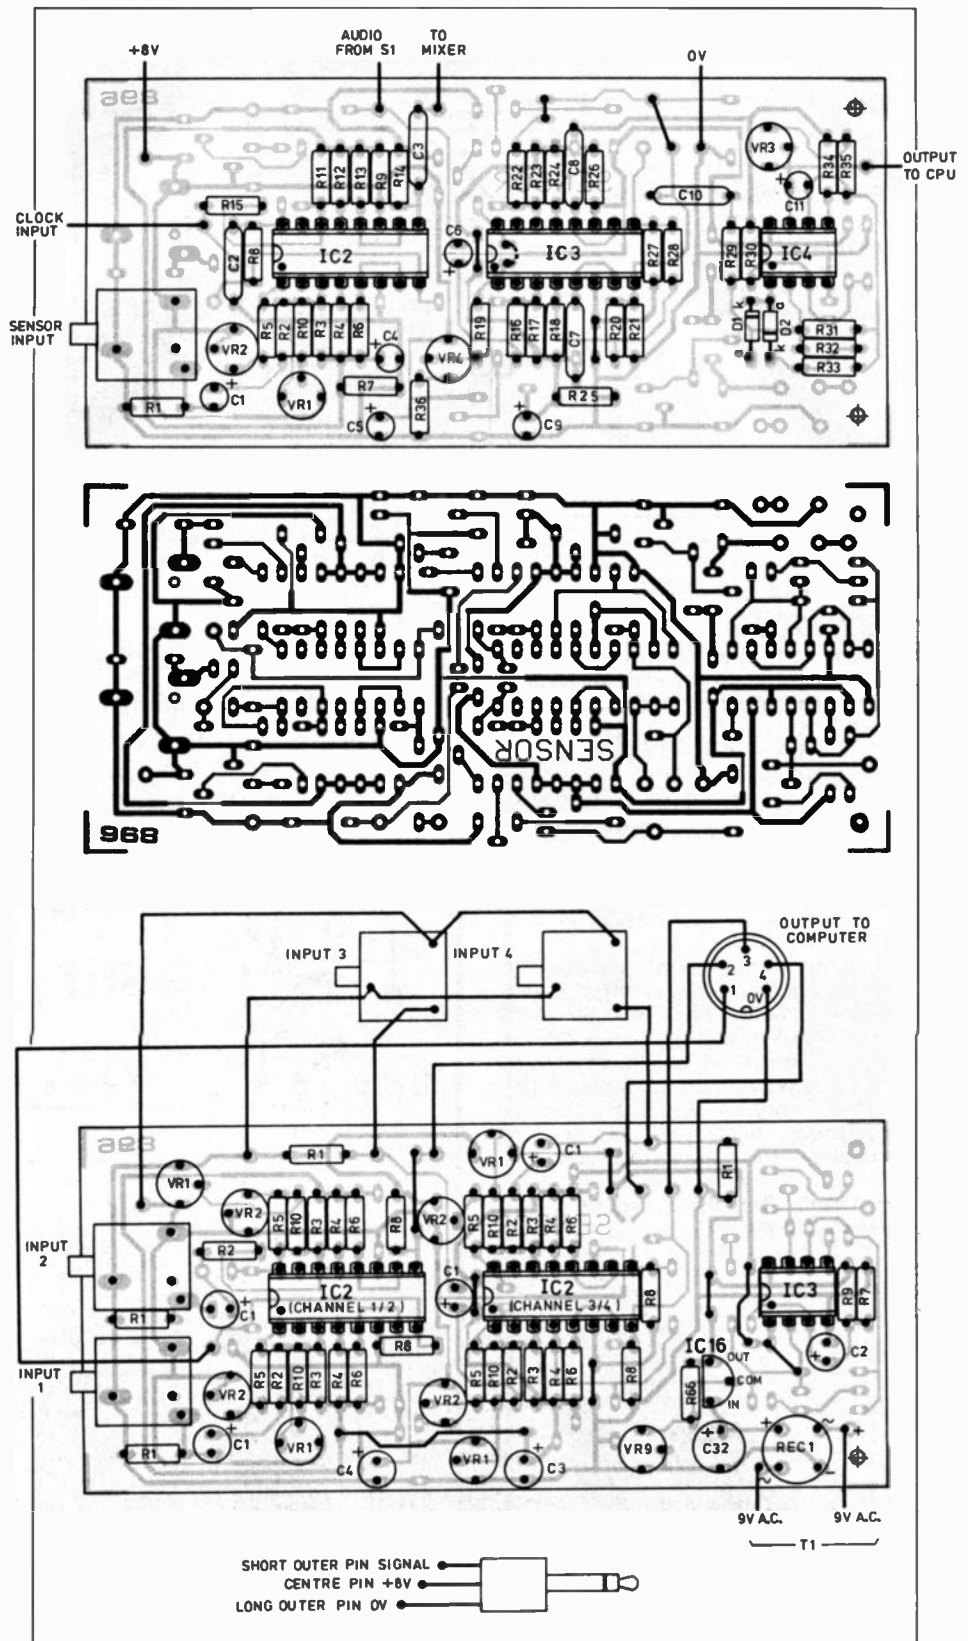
Printed circuit board component layouts and full size copper foil master pattern for Option 1 and Option 2.
